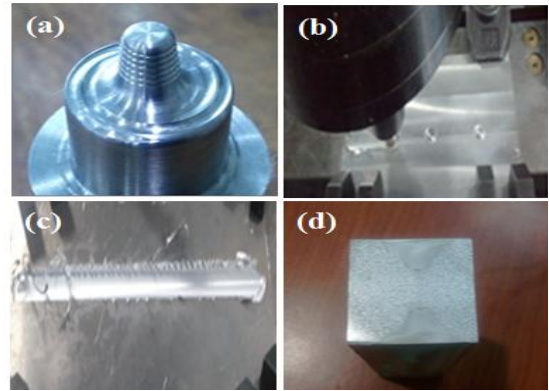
The surface shape and defect free FSWed by SKD61 tool; (a) SKD61 tool, (b) FSW progress, (c) FSW completion and (d) nondefect
